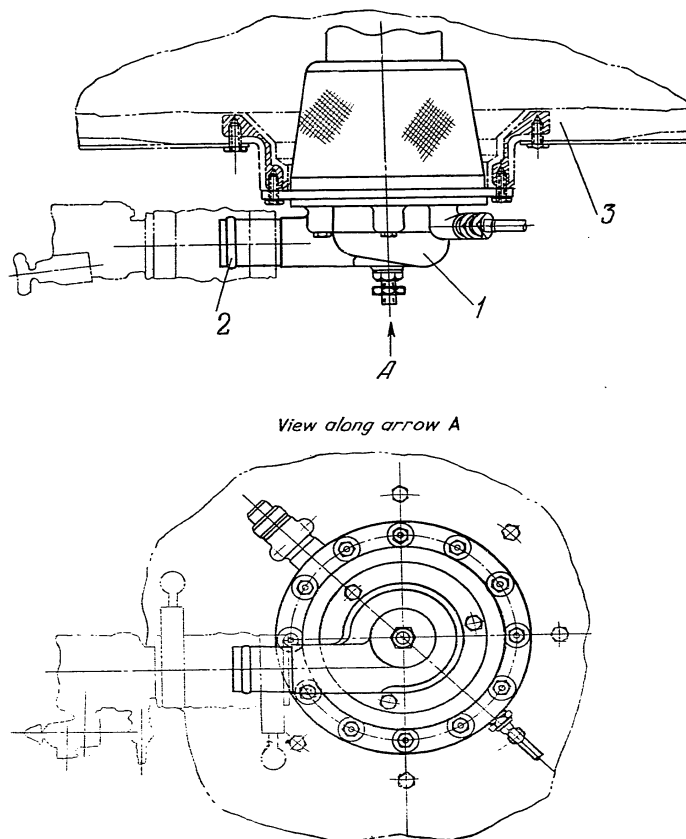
ARRANGEMENT OF FUEL BOOSTER PUMP IHB-2 INSIDE TANK
